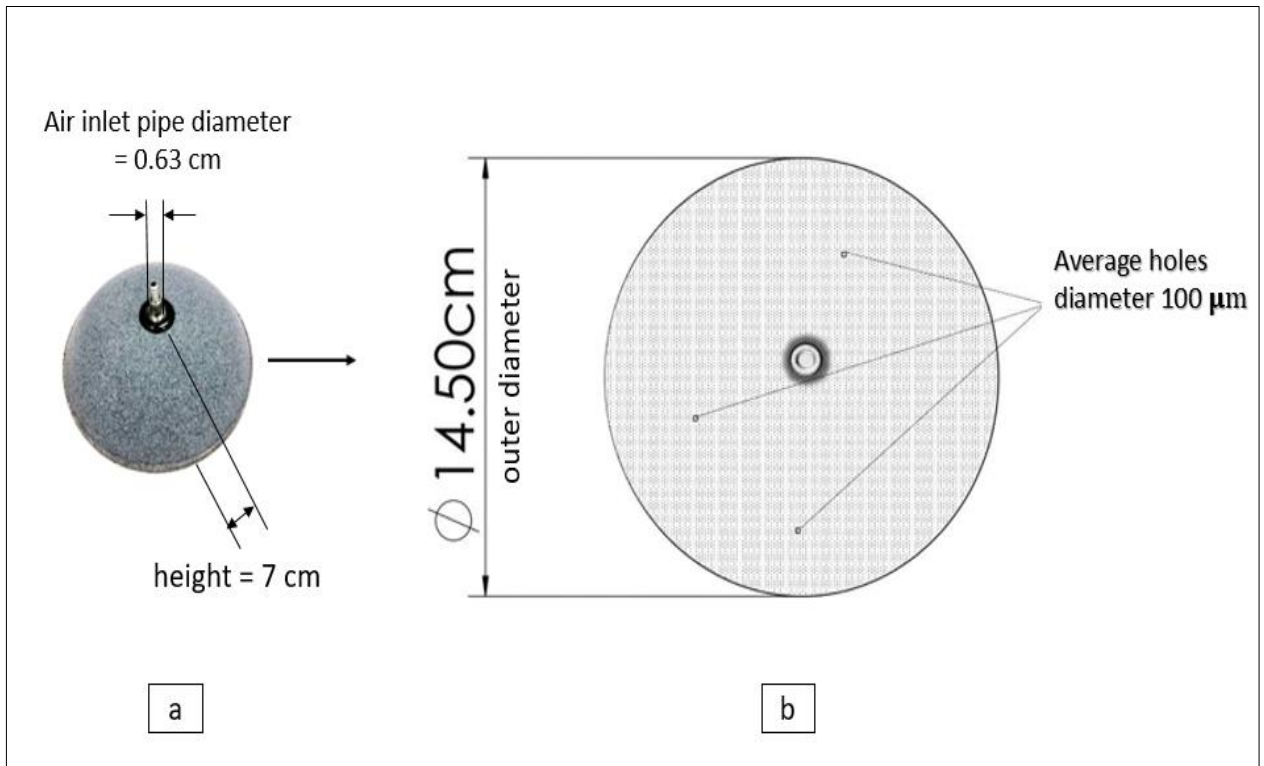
Sparger specification: (a) over view, (b) planning view
